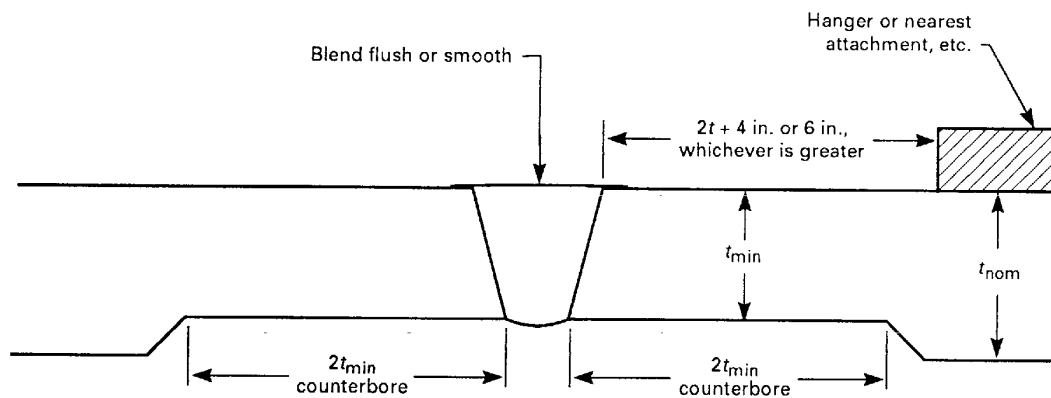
PIPE TO PIPE WELD
